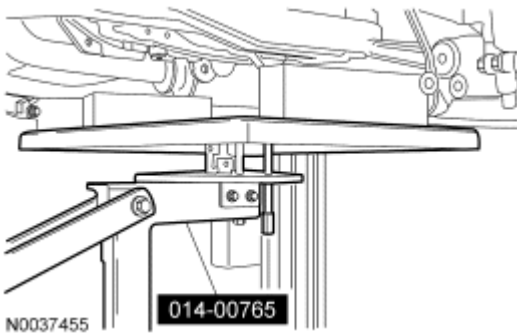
Positioning Special Tool (014-00765) Under Subframe Assembly
